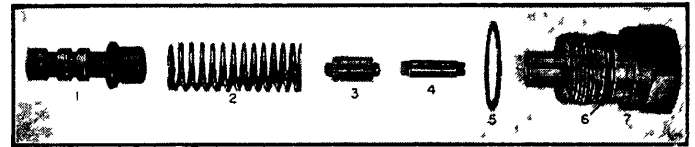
LAYOUT OF PRESSURE REGULATOR. 1952
